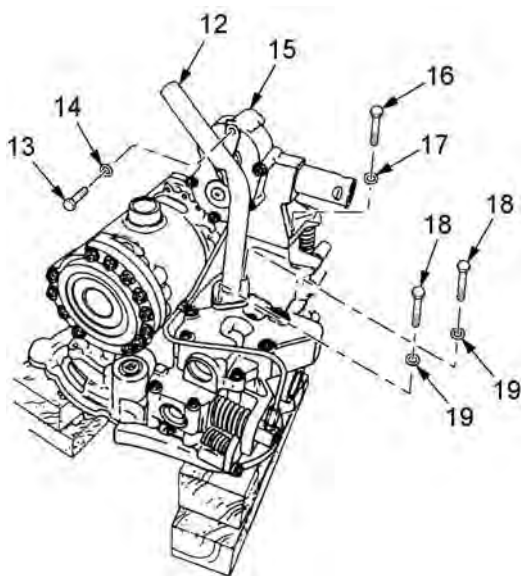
Scavenge Tube Assembly and Output Oil Pump Assembly Removal.
